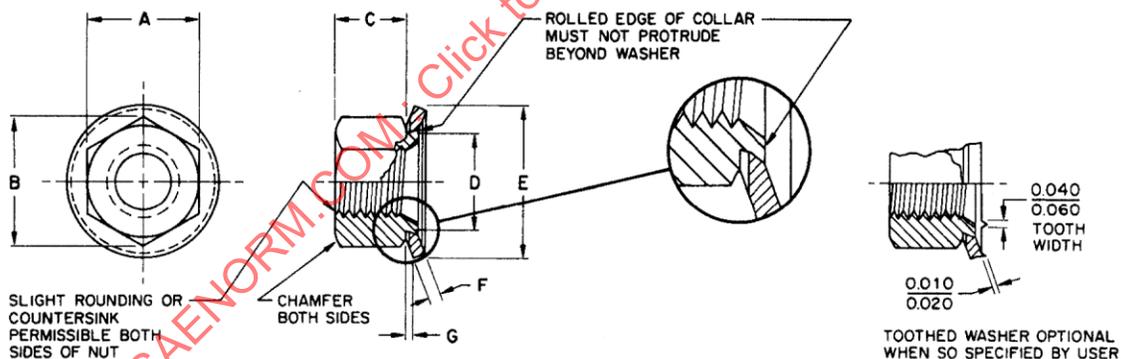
NUT AND CONICAL SPRING WASHER ASSEMBLY
